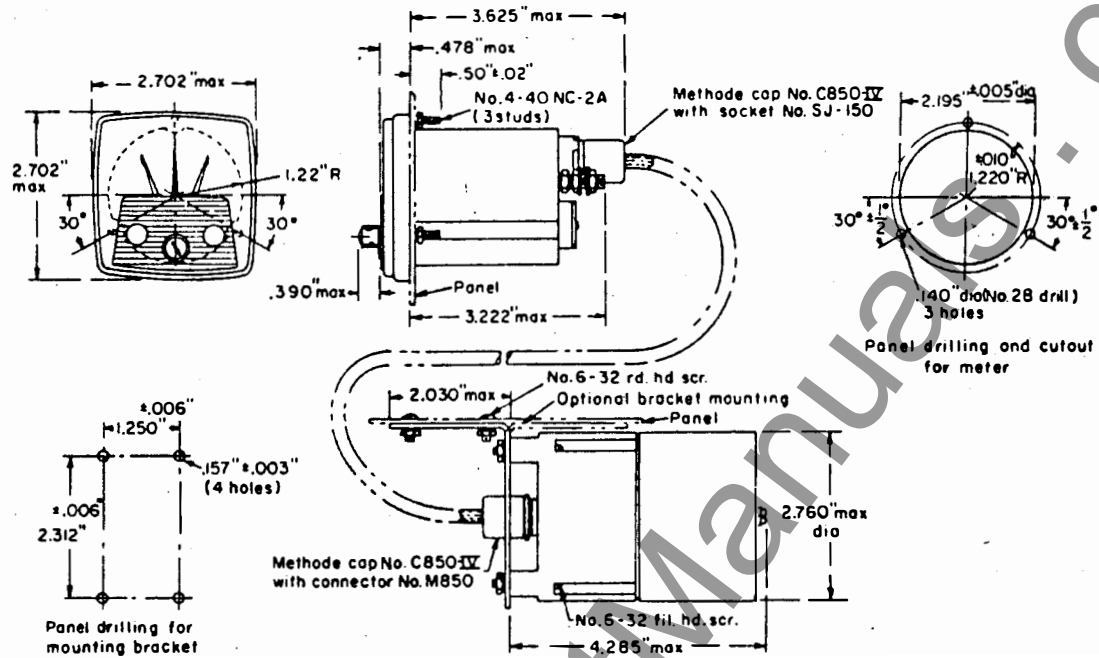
Outline and panel cut-out dimensions for Type 195 meter relay, 2 1/2-inch size, control unit remote mounted as required due to small-size indicator set-point unit. (This Figure shows remote mounting of control unit for both Type 195 and Type 196 meter relays, as desired.)
